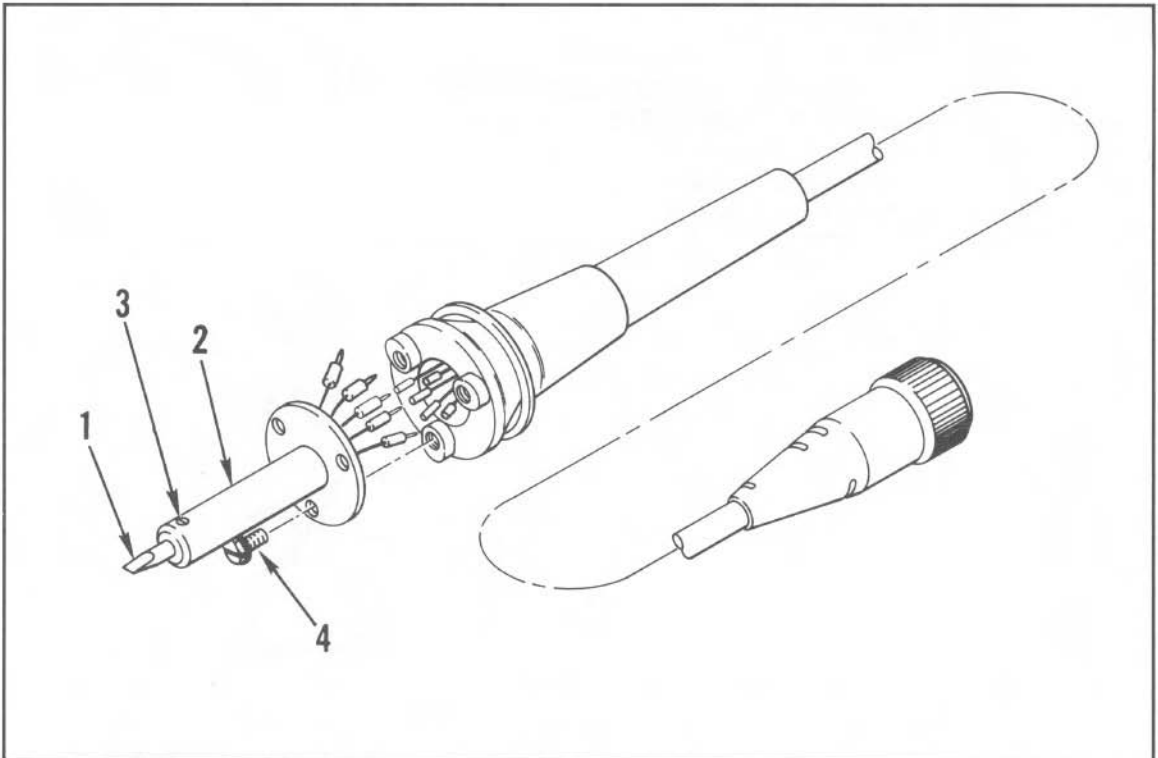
REPLACEMENT PARTS FOR IR-65 SOLDERING IRON HANDPIECE ASSEMBLY
